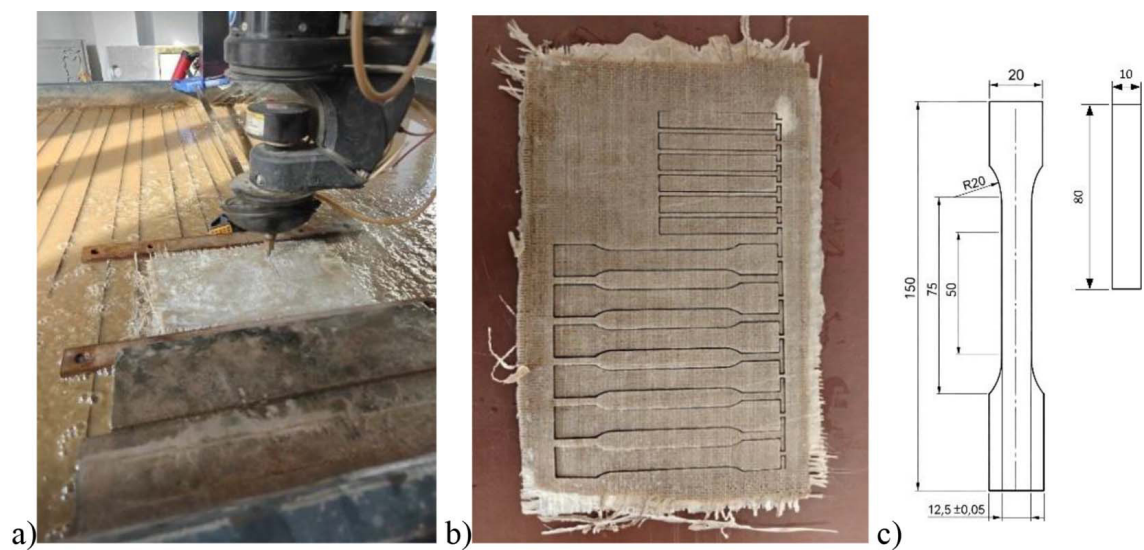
Preparation of test specimens: (a) waterjet cutting process; (b) specimens obtained from the hybrid composite; (c) dimension of physical sample
